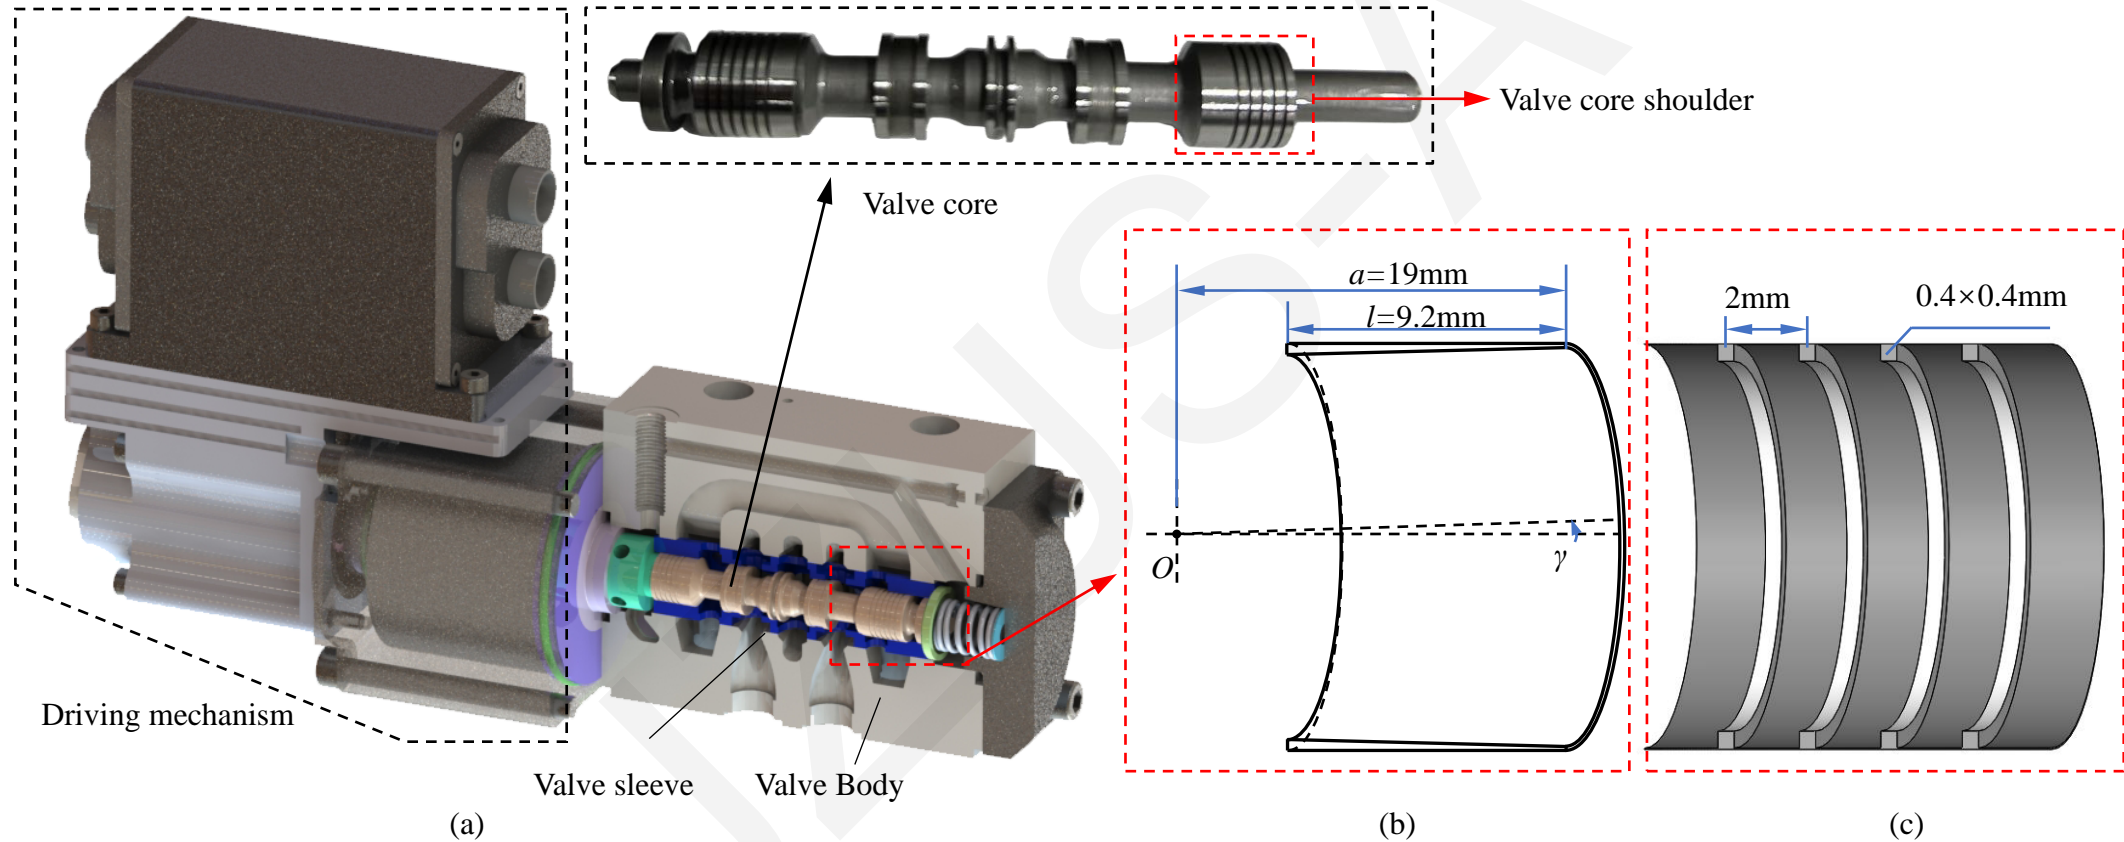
Hydraulic spool valve and flow channel of the fit clearance
